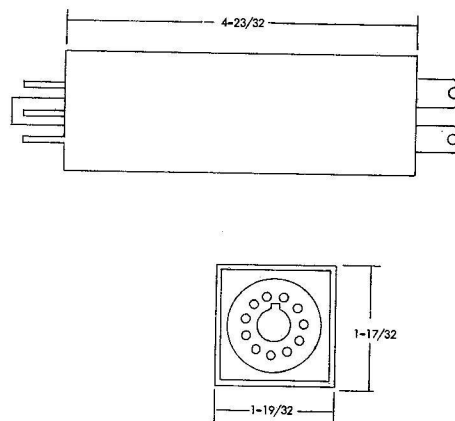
Dimensional Drawing of 15337, 15338, 15339 Transformers
